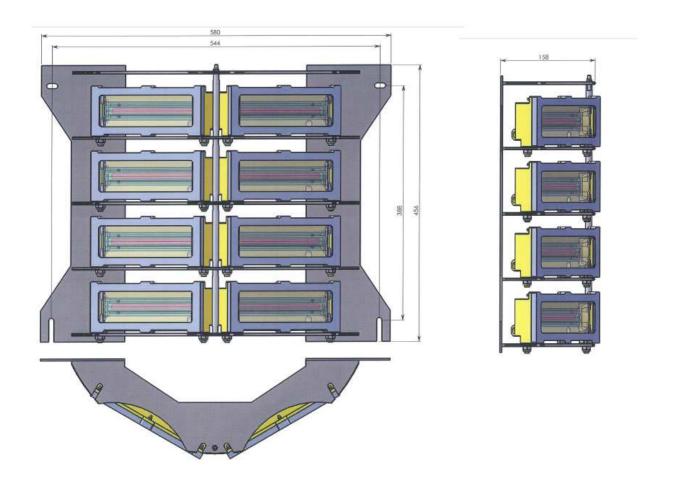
Outline and mouting dimensions HI flashhead P/N:113781L4
